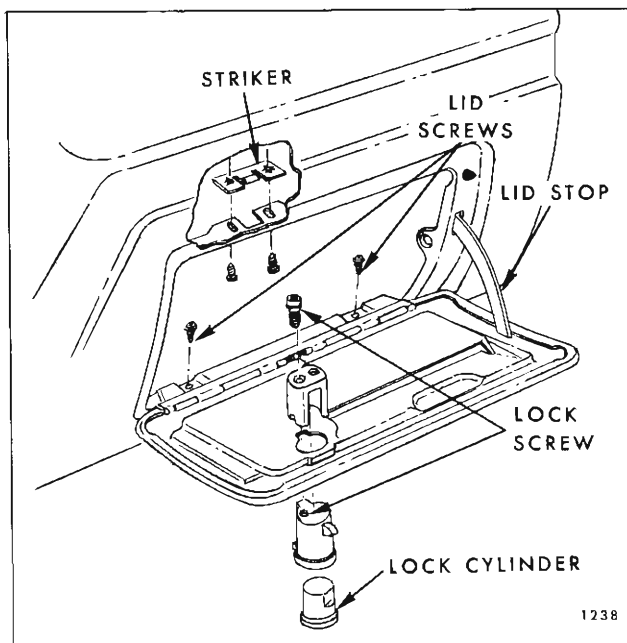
C16—Instrument Panel Compartment Door Assembly - 23000 Series
